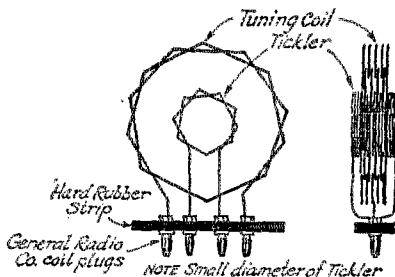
REVERSIBLE PLUG-IN COIL SYSTEM
